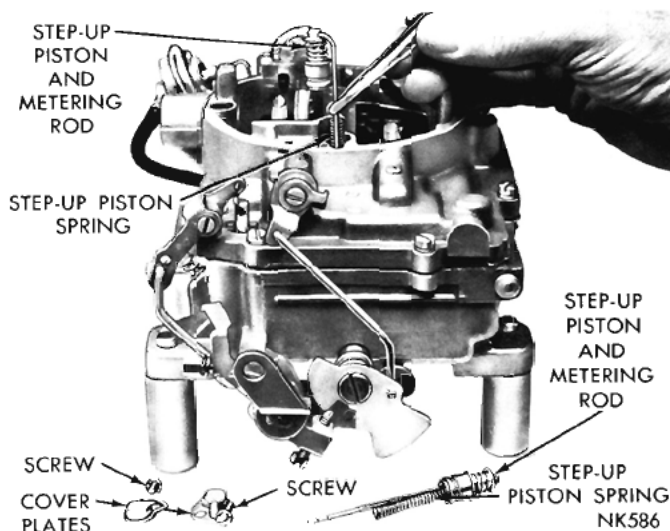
Removing or Installing Step-Up Pistons and Rods
